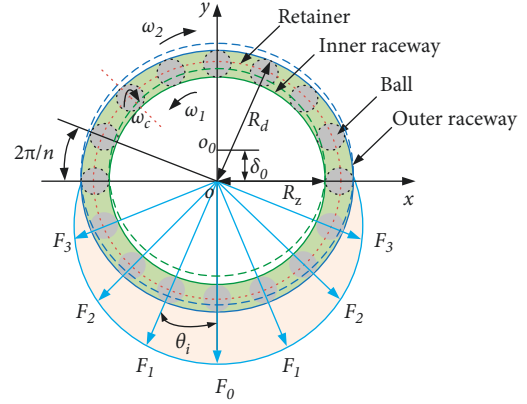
Force diagram of inter-shaft dense ball bearing. Solid lines are ideal bearings. Dotted lines are actual bearings with radial clearance (There is radial clearance).
